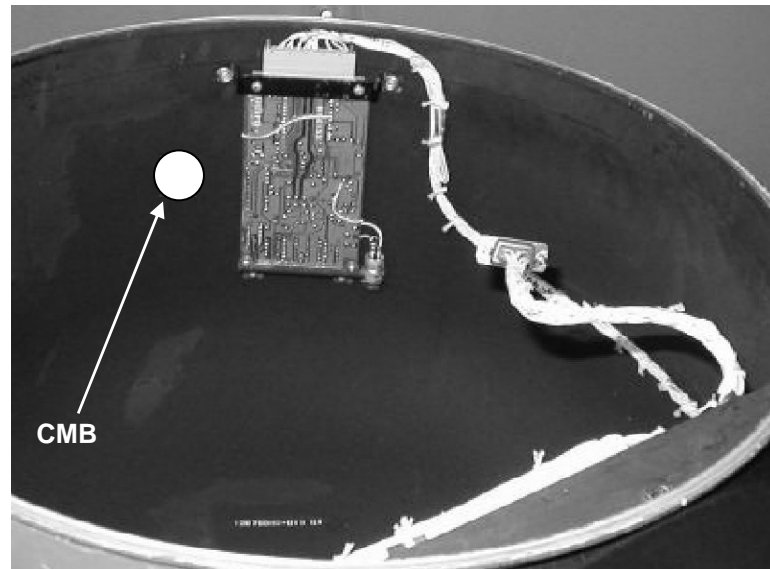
Night Shroud Assembly (AH-64A/D) CMB Location
